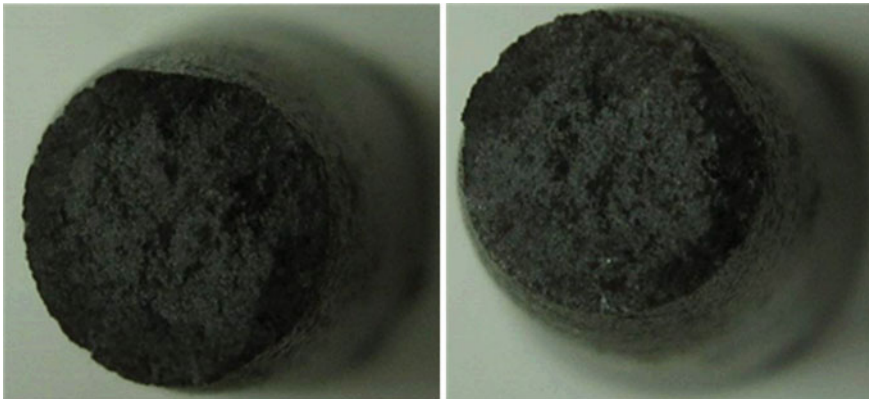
Fracture surface observed by a common camera (KA05)
